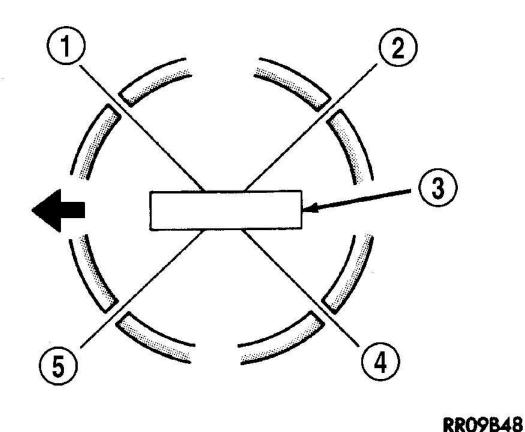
Identifying Piston Ring End Gap Positions Courtesy of CHRYSLER LLC
